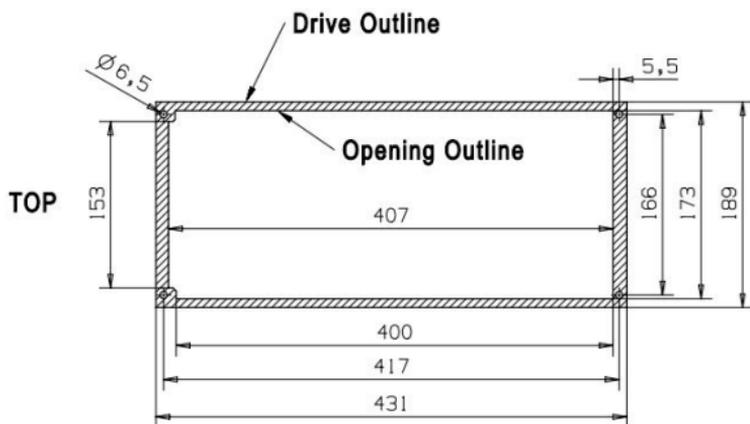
Flange mounting cutout dimensions for MI5 (Unit: mm)
